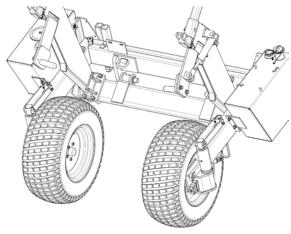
Front Wheels Inboard LOADING THE INSTALLER WITH FORKLIFT
